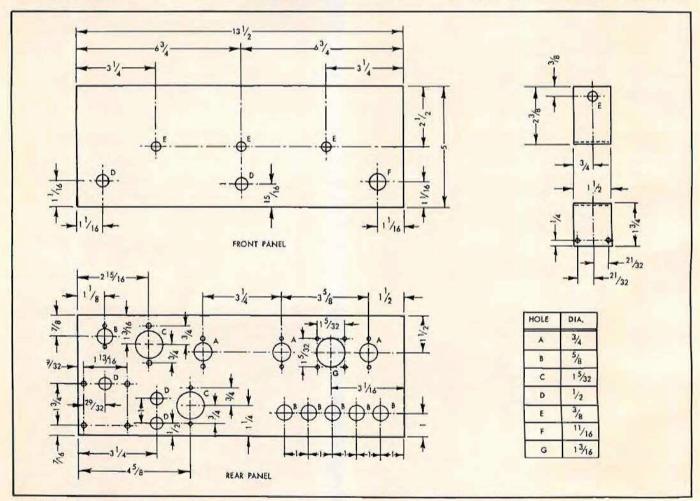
Chassis layout. Screw-hole diameters for mounting of parts are left to discretion of builder. At right is shown bracket for S₂.
